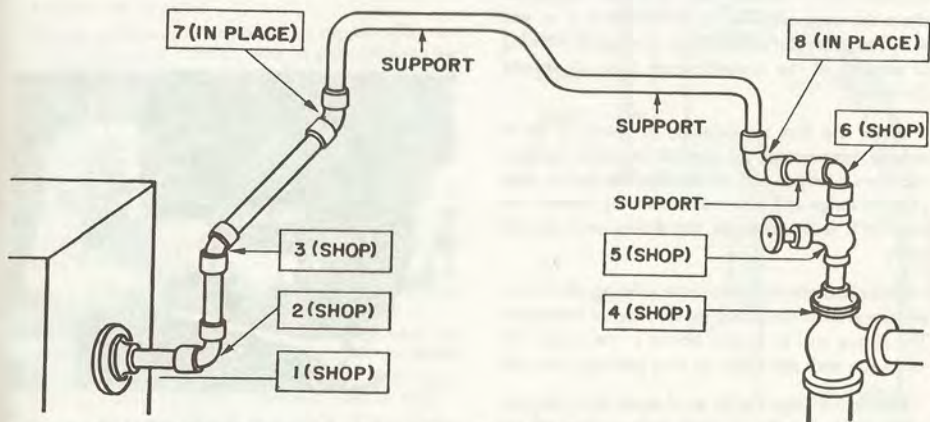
Here is a typical order of making up brazed joints for part of a piping system. You may work toward one end or toward an accessible fitting in the middle. It is often easier to make up small assemblies first at the bench.
